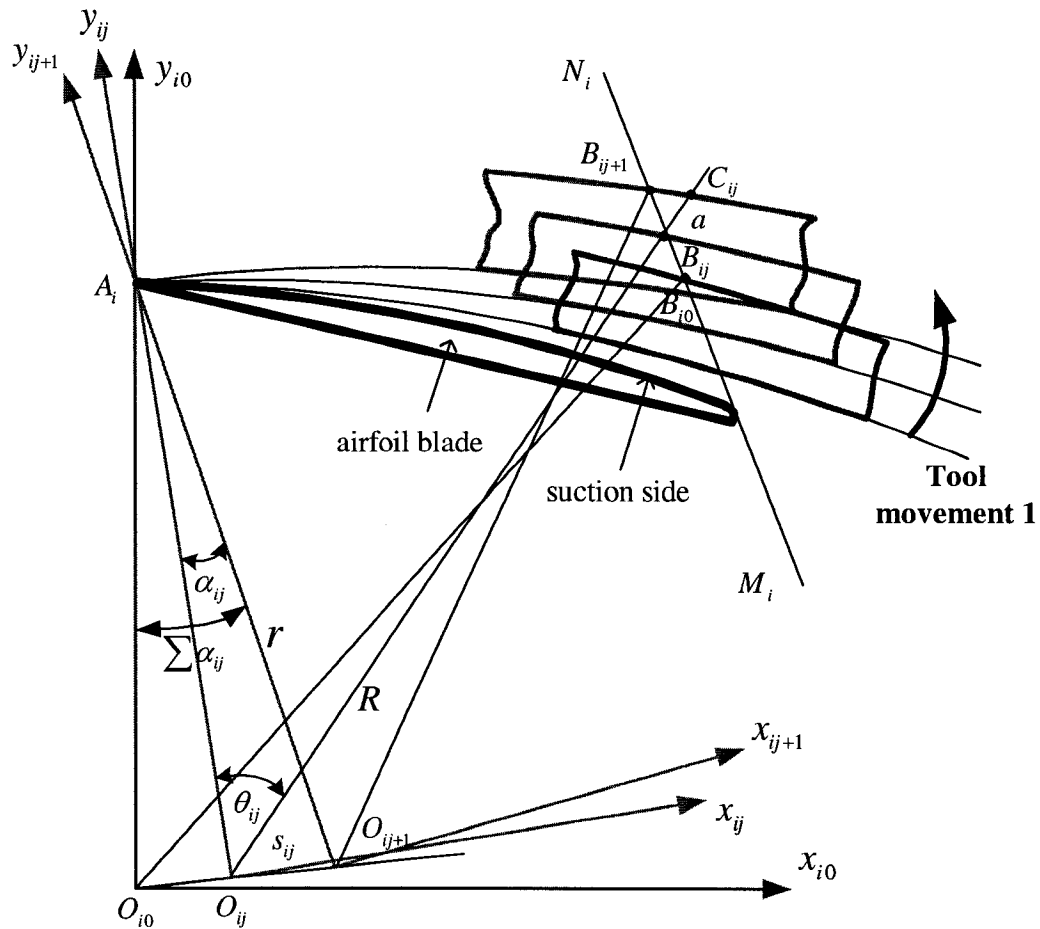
Tool movement 1 – the rotation of the tool centre around the interior point,  $A_i$ , and the machining done with the outer side of the tool
